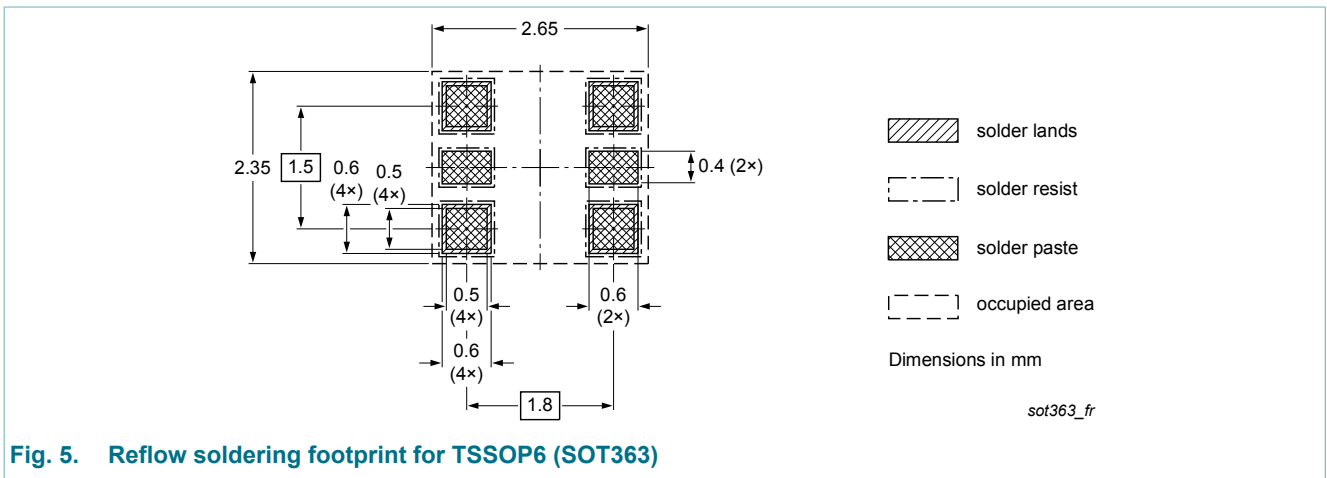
Reflow soldering footprint for TSSOP6 (SOT363)
